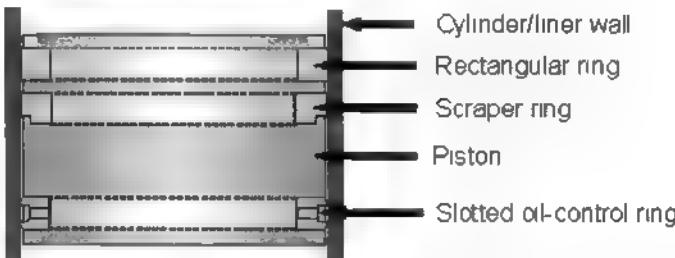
Cross-section through a cylinder and piston fitted with different types of piston ring.
